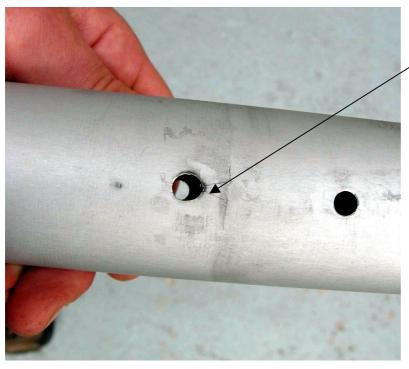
Quik Keel Assembly, the hole is where part 18 passes through the keel tube.
